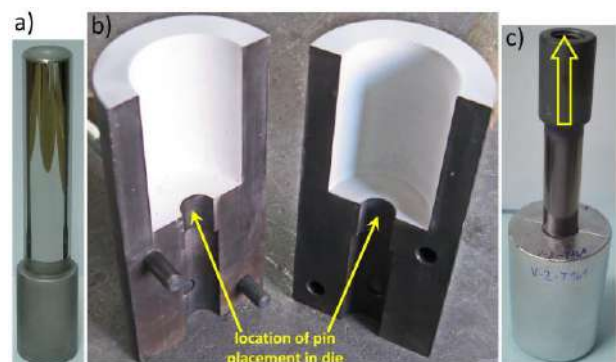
a) Pin sample, b) experimental casting die, c) pin-casting assembly
